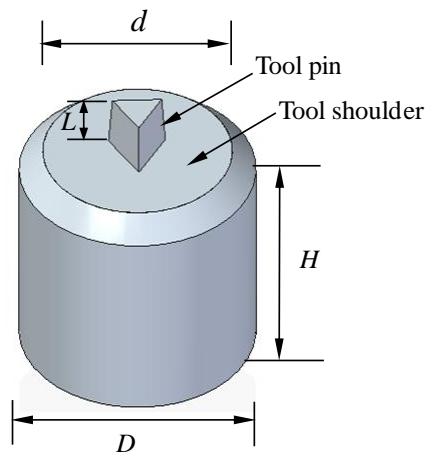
Schematic of a taper triangle tool presenting the geometrical parts.
